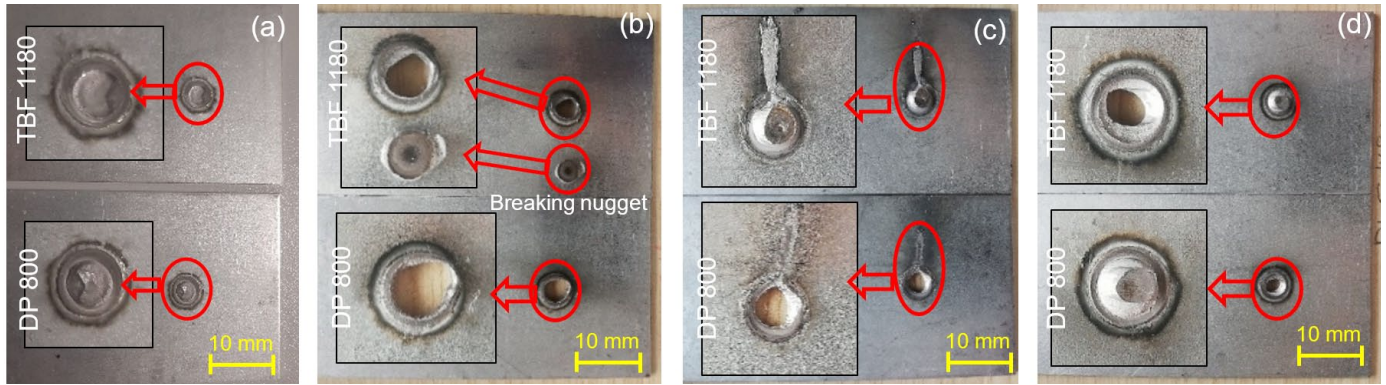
The fracture modes of the S1 (a), S3 (b), S4 (c) and S5 (d) welded joints after the tensile-shear test
